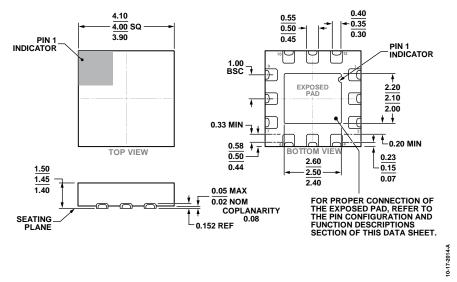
12-Lead Lead Frame Chip Scale Package [LFCSP\_SS] 4 mm × 4 mm Body and 1.45 mm Package Height, With Side Solderable Leads (CS-12-3) Dimensions shown in millimeters
